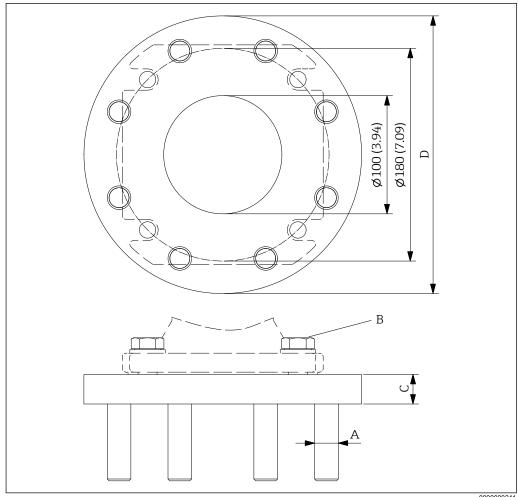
Adapter flange (example DN100 PN25/40). Unit of measurement mm (in)
